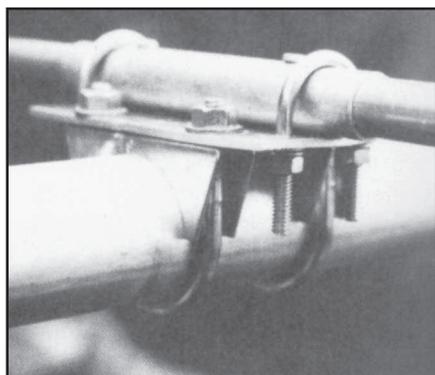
The element-to-boom clamp. Galvanized U bolts are used to hold the element to the plate, and 2-inch galvanized muffler clamps hold the plates to the boom.
